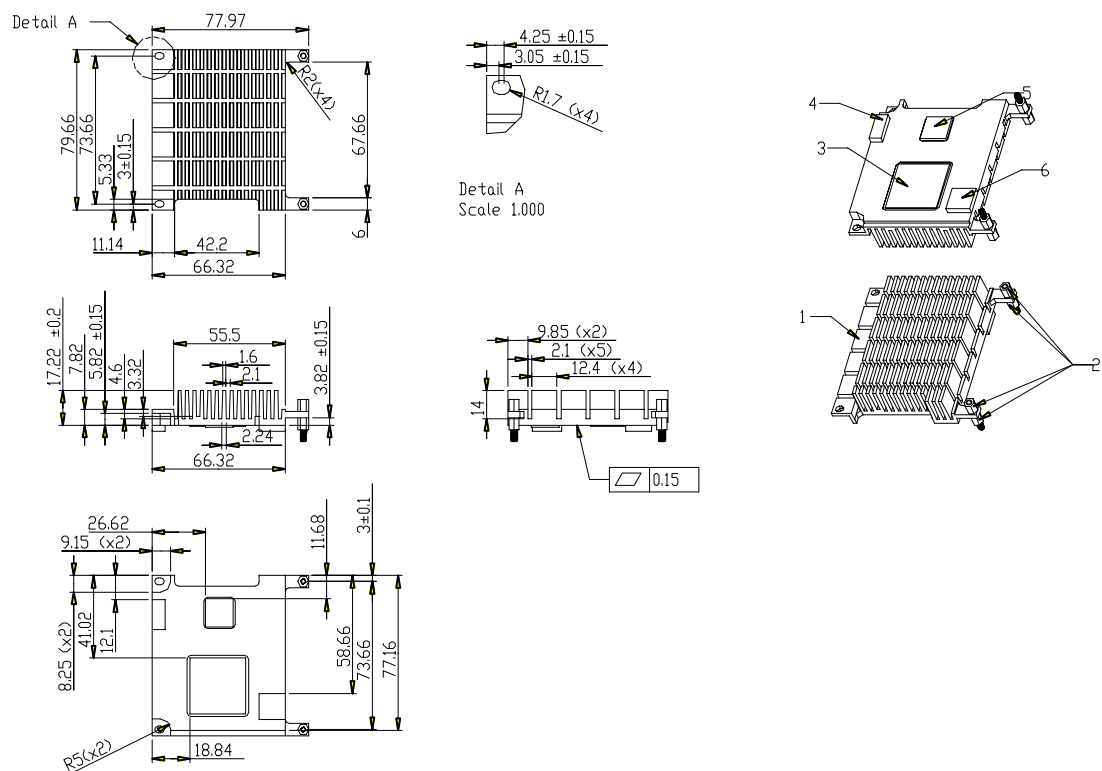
PCM-3362Z/Z2 Heatsink Mechanical Drawing for wide temperature version
